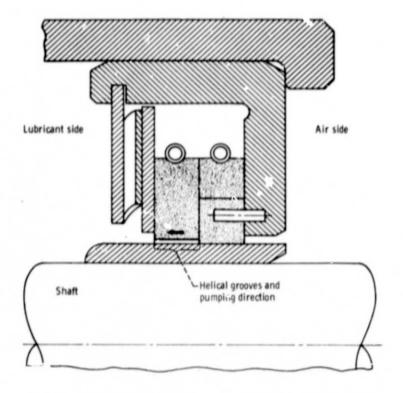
Circumferential se I modified to have helical grooves in side cover ring.
